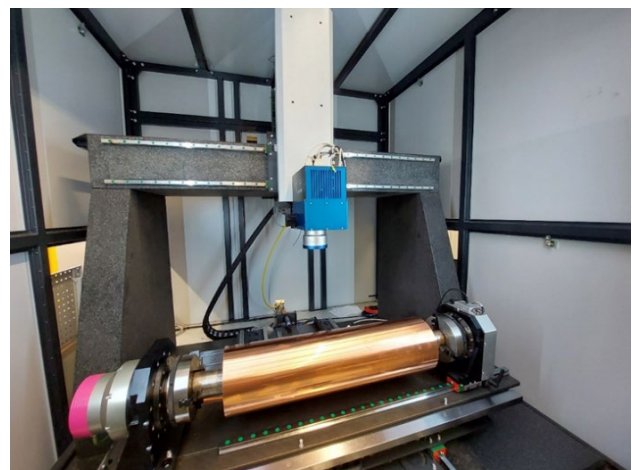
Roll engraving machine with polygon scanner, copper roll and fiber laser. On the roll, a "puzzle-like" pattern is shown fabricated for test purpose in a black paint with the polygon scanner and a nanosecond pulsed laser.
